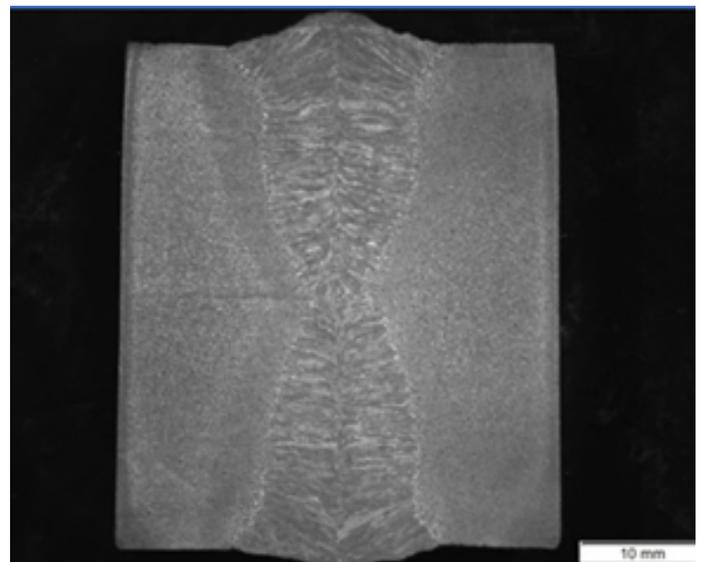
Macrographic metallographic specimen of the cross-section of the elements subjected to two-sided arc welding process (with deep penetration)
